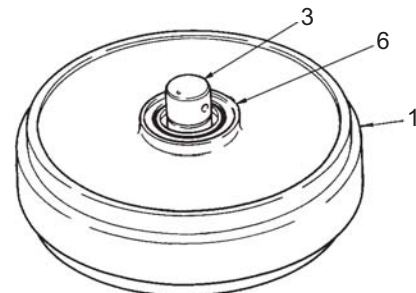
Inserting idler (9) and installing floating seal (6)
